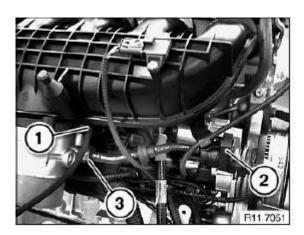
Detaching Crankcase Breather Cylinder Head Cover Courtesy of BMW OF NORTH AMERICA, INC.
